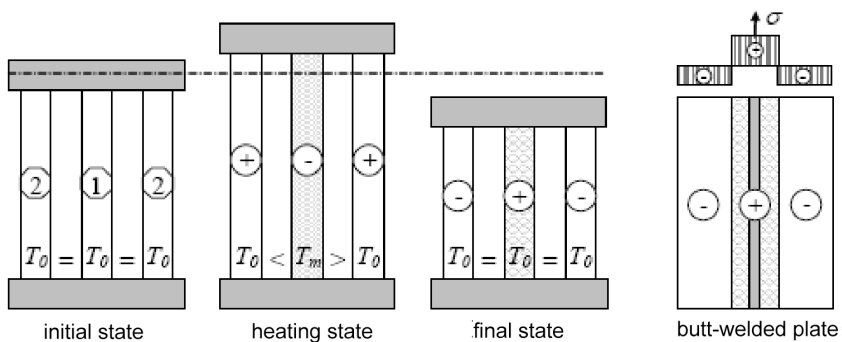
Three-bar system representing a butt-weld in a rectangular plate.
